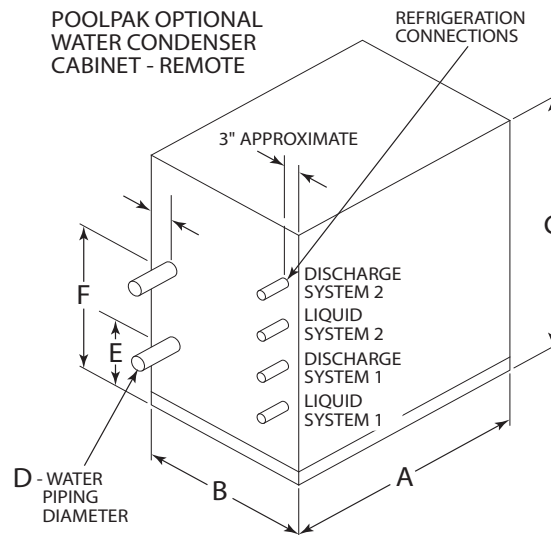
PoolPak Remote Water Cooled Condenser view
